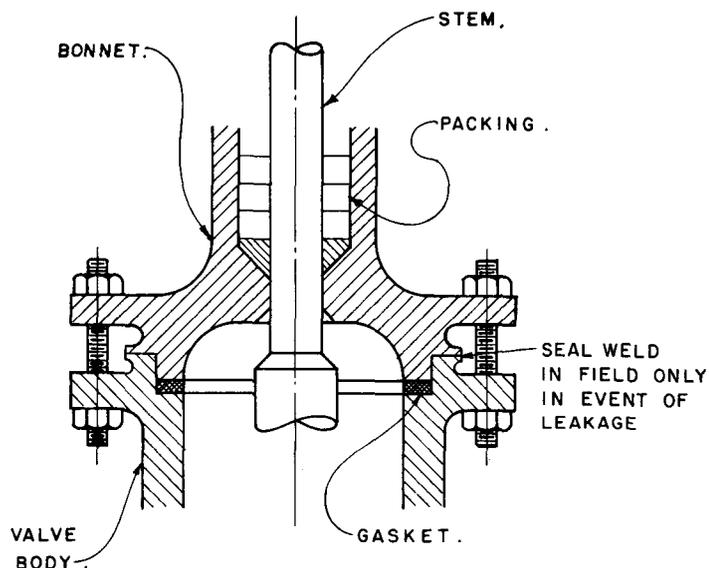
Seal-Weld Backup for Bonnet-to-Body Closure in Type II Valves.
